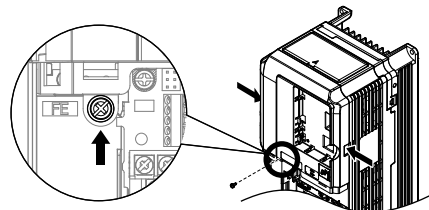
Remove the Front Cover (2A0004 to 2A0081, 4A0002 to 4A0044, and 5A0003 to 5A0032)
